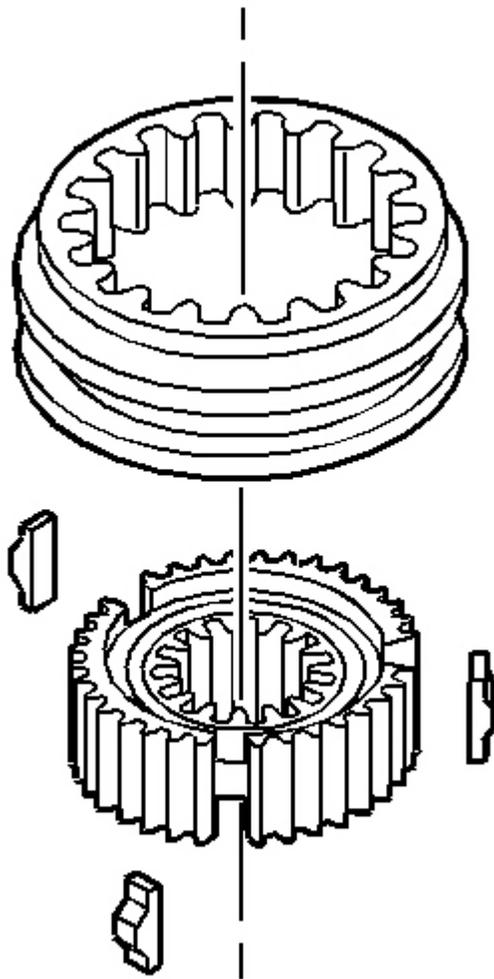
Installing/Removing Synchronizer Sleeve & Keys On Hub
